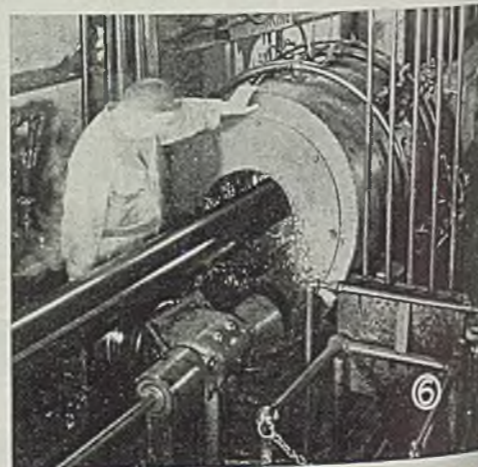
One of three million-dollar, million-ampere flash welders capable of making a 40-ft seam weld at one step
